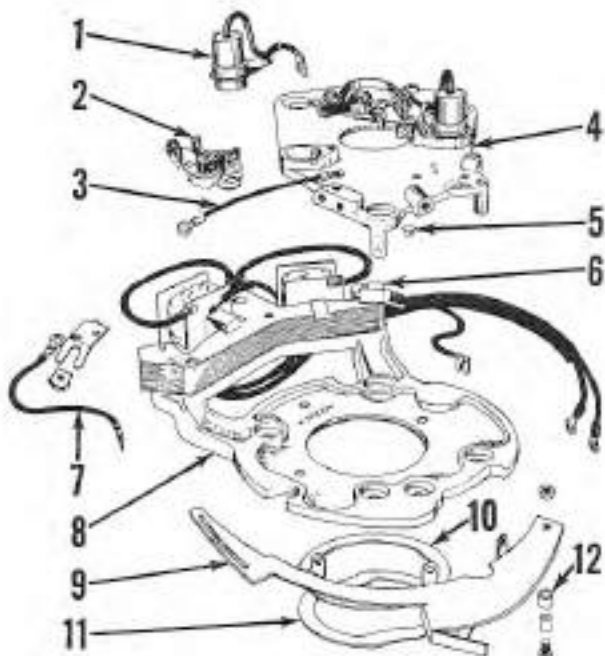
Exploded view of crankshaft mounted distributor assembly and alternator generator used on late models.
